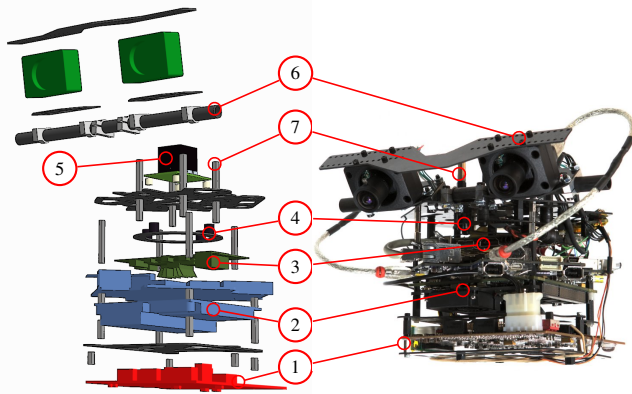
Exploded and assembled view of the processing stack, showing (1) FPGA card, (2) Core2Duo board, (3) Gumstix (4) plate that carries the stack, (5) IMU (not visible in assembled view) and (6) stereo camera assembly. The stack is mounted to the quadrotor via (7), which is rigidly fastened to the plate (4). Dampers are placed on (4), so that the whole stack is damped w.r.t. the quadrotor frame. This allows fast disassembly from the quadrotor frame without losing IMU to camera calibration.
